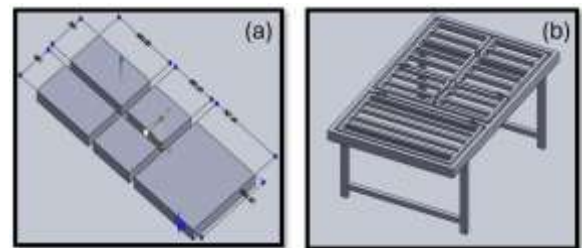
The design of the prototype patient bed is as follows: (a) a bed platform comprising six sections, including upper and lower parts; (b) a bed structure comprising of the bed frame, six sections, and legs;
